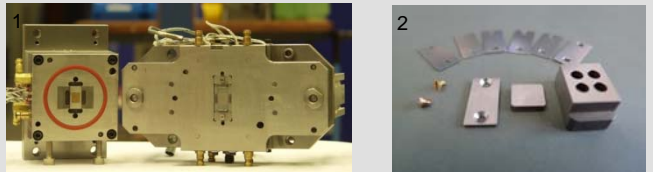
1) mold for the microsystem 50 injection molding machine 2) mold insert holder plate
